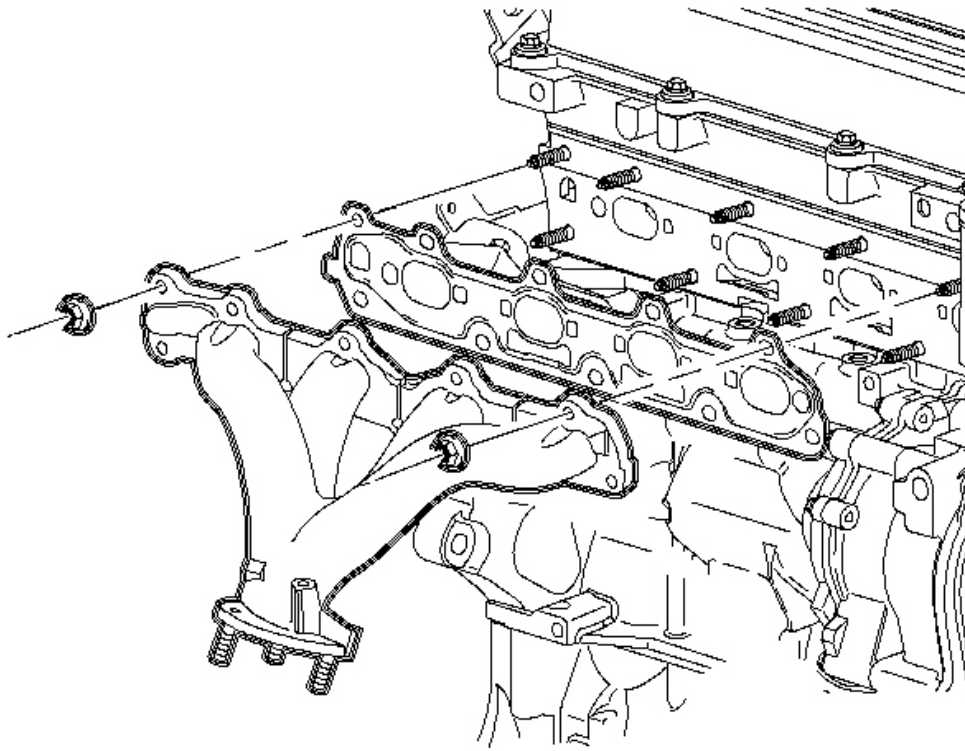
View Of Exhaust Manifold Assembly (L61)
